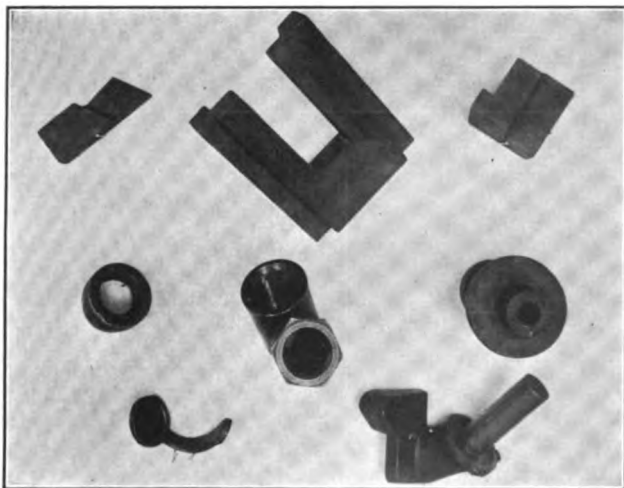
A few castings used to teach the principles of oblique projection of straight lines and plane surfaces, and circles and cylindrical surfaces.
